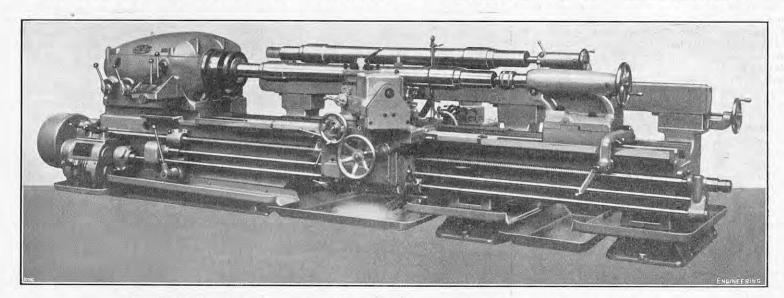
20/24-in. Swing Lathe with Hydraulic Copying Attachment; John Lang & Sons, Ltd.
